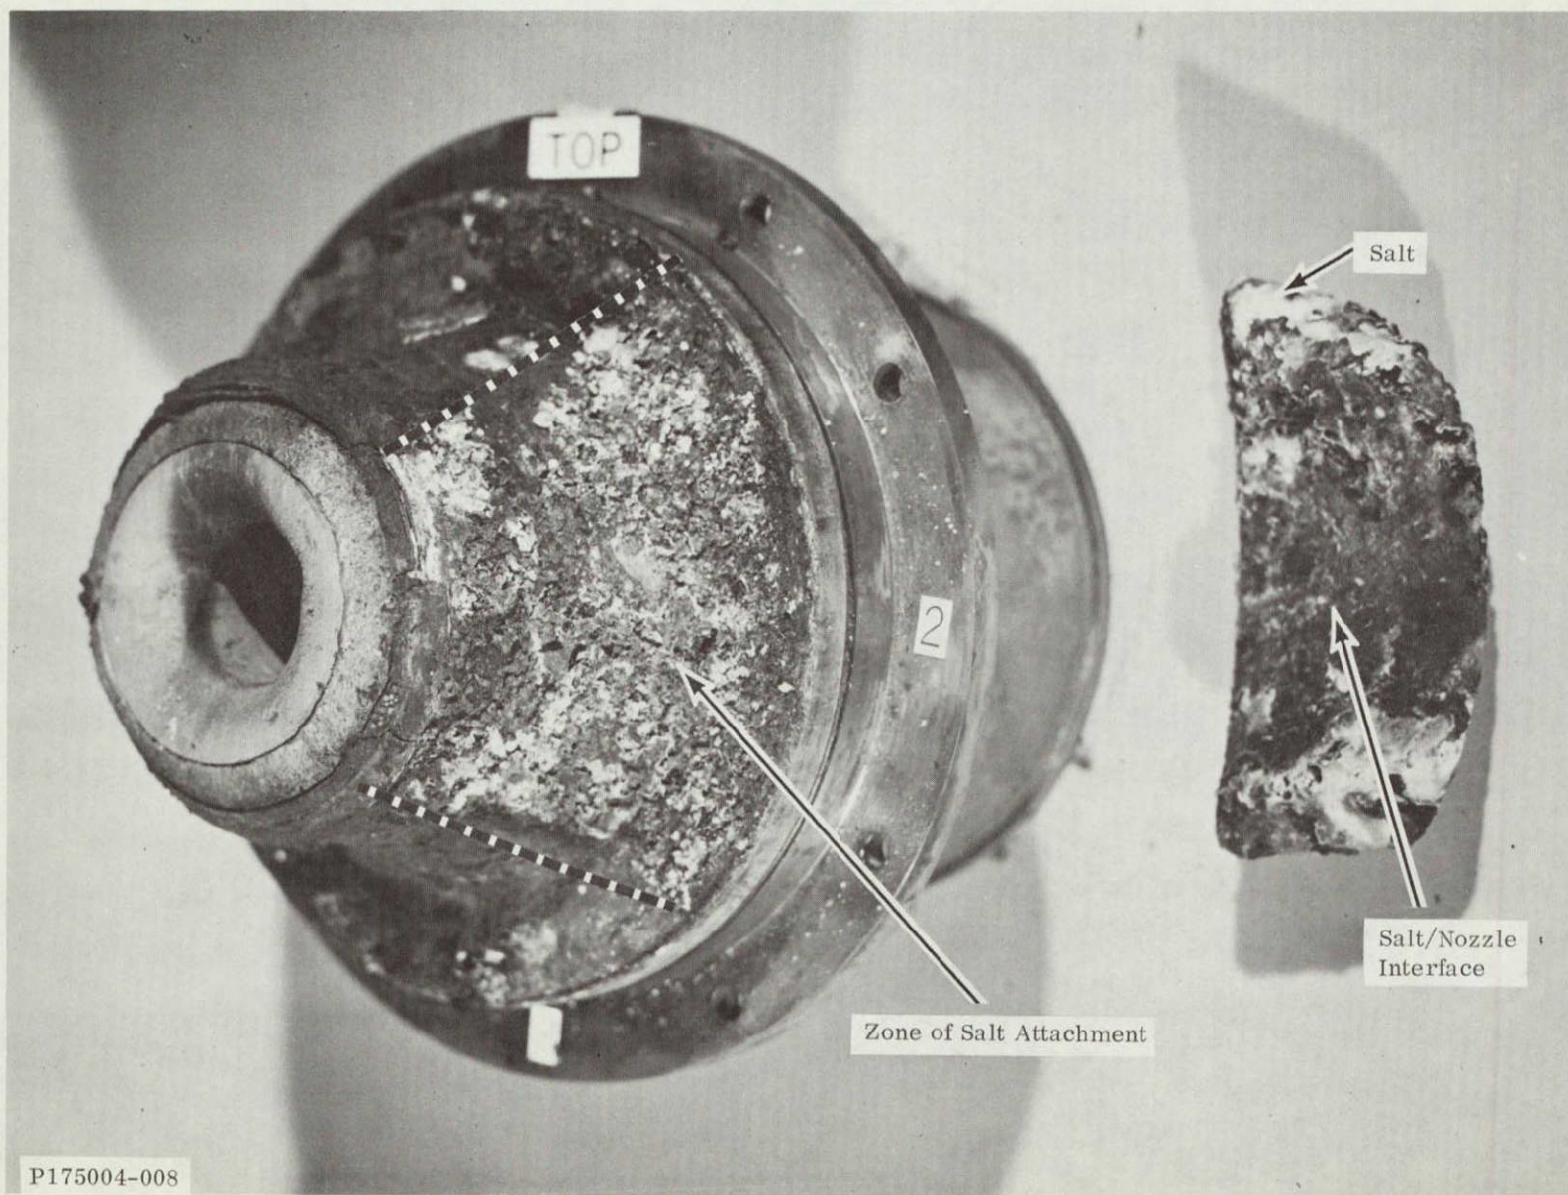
NOZZLE QUENCH ASSEMBLY AFTER TEST
